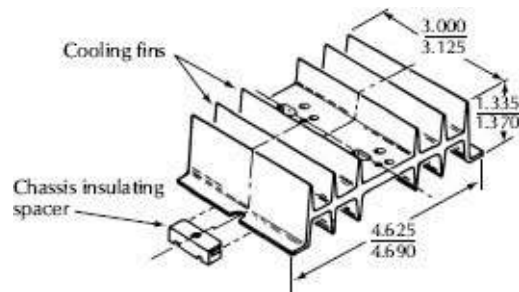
Typical heatsink for mounting two transistors. Courtesy Delco Electronics Corp.
